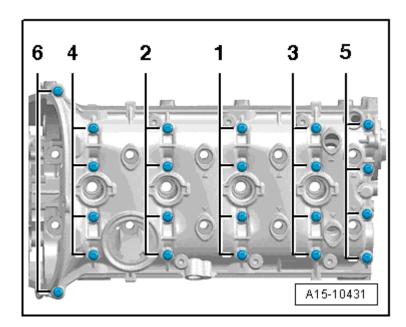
Identifying Cylinder Head Cover - Tightening Sequence
